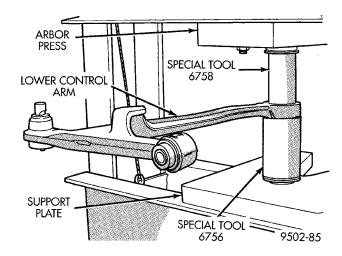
Special Tools Assembled For Removing Rear Bushing
